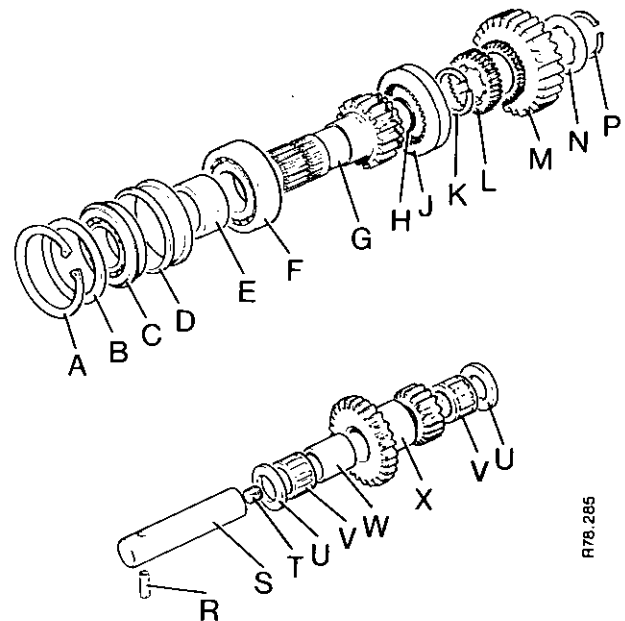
SLOW/NORMAL GEARS 1410 TRACTOR TRACTOR
